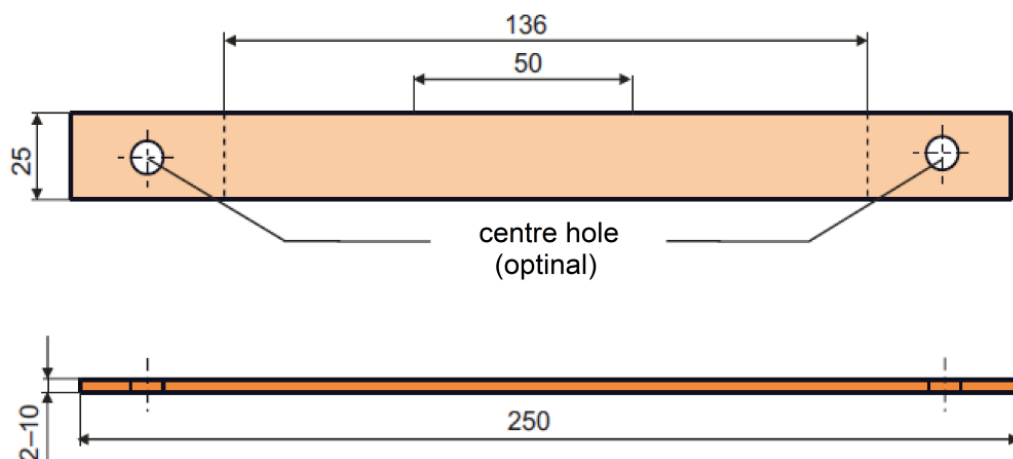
Specimen geometry for the tensile test according to ISO527-4 type3
